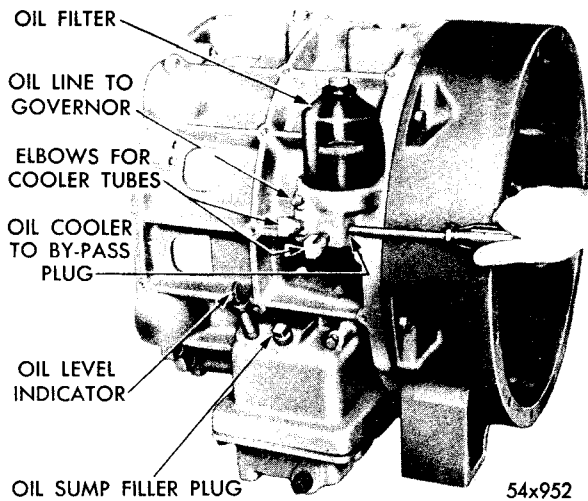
Removing or Installing the Oil Cooler By-Pass Plug
